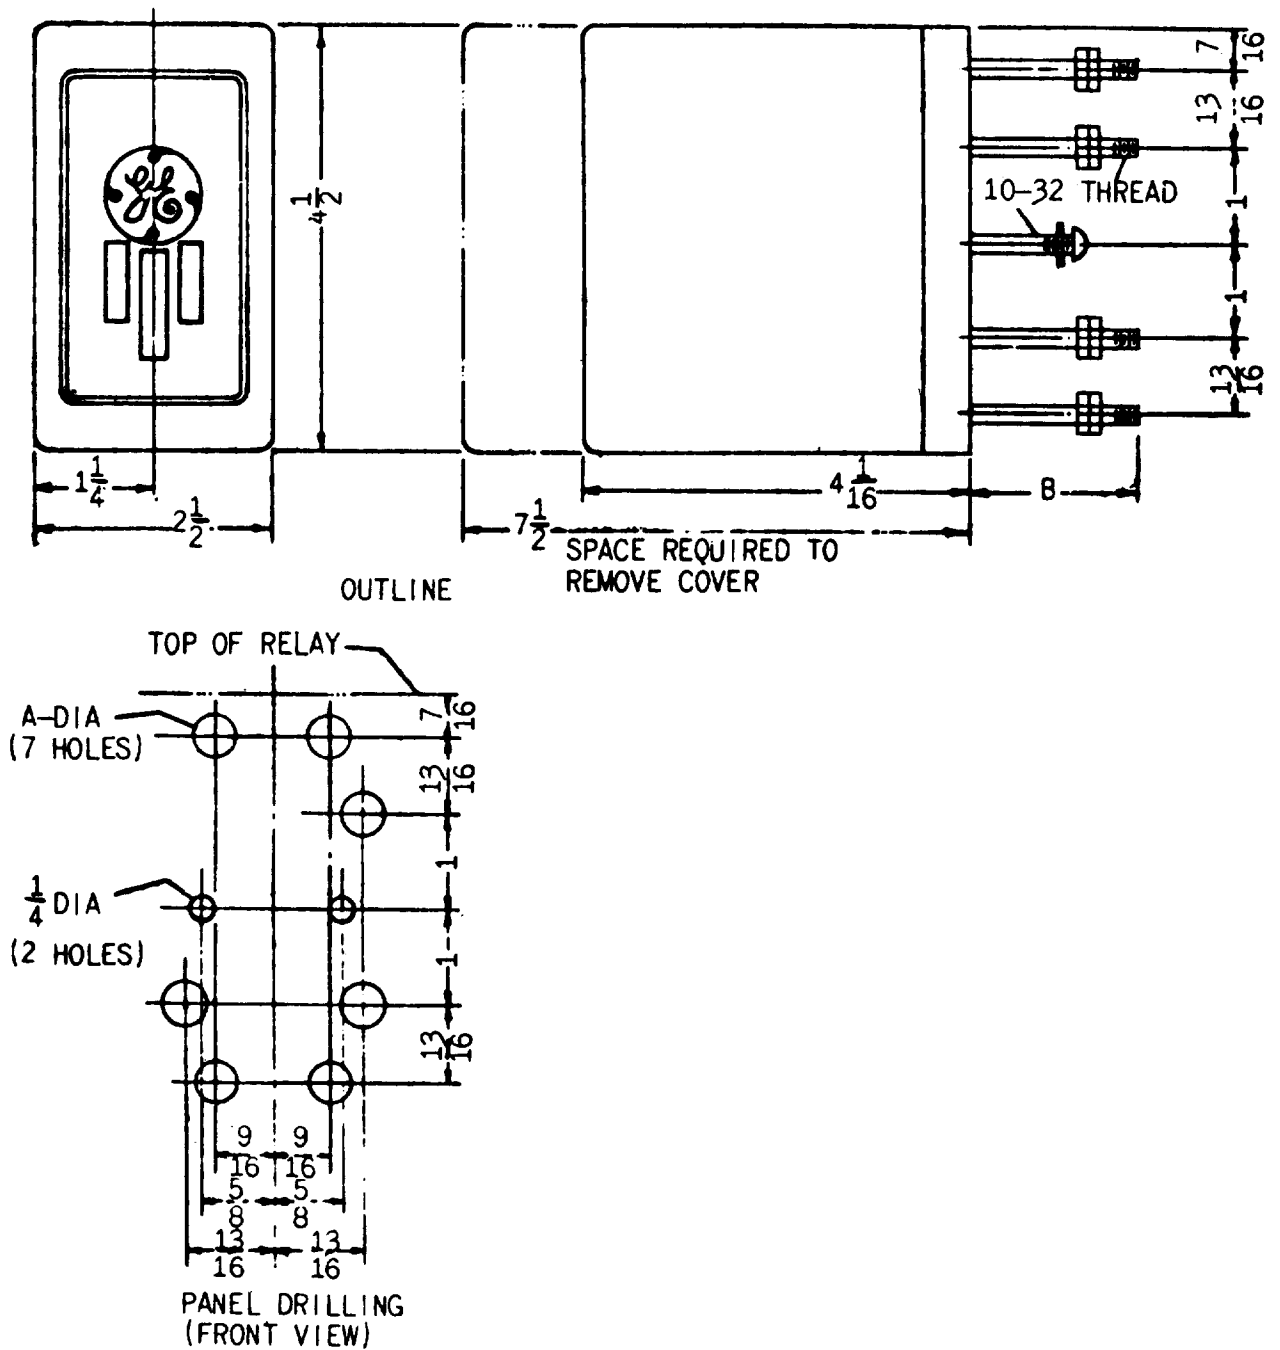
(K-6400533-4) Outline and Panel Drilling for Surface Mounted Back Connected HGA14D Relay.
